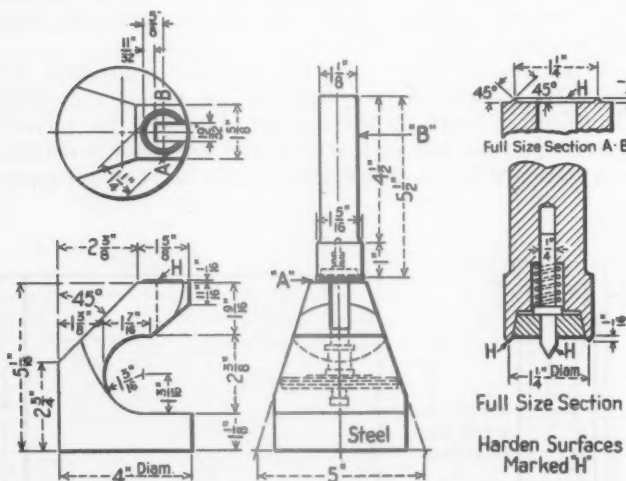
Jig for straightening wing on end of equalizing piston of distributing valve
